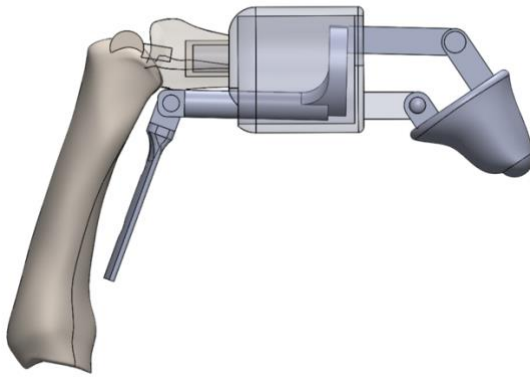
CAD drawing showing 60° ROM of thumb tip when MCP joint rotates to 75°.
